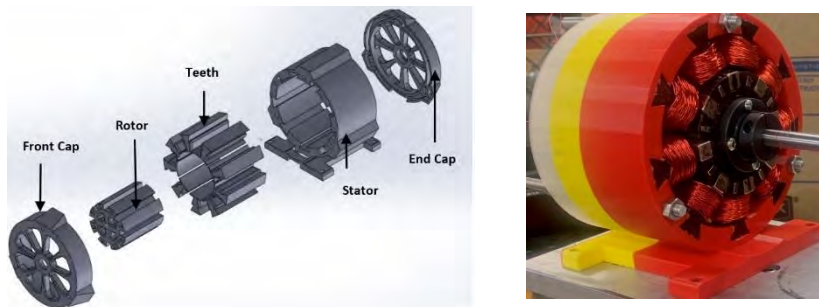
Generator Assembly: SolidWorks (Left) & Prototype (Right)
